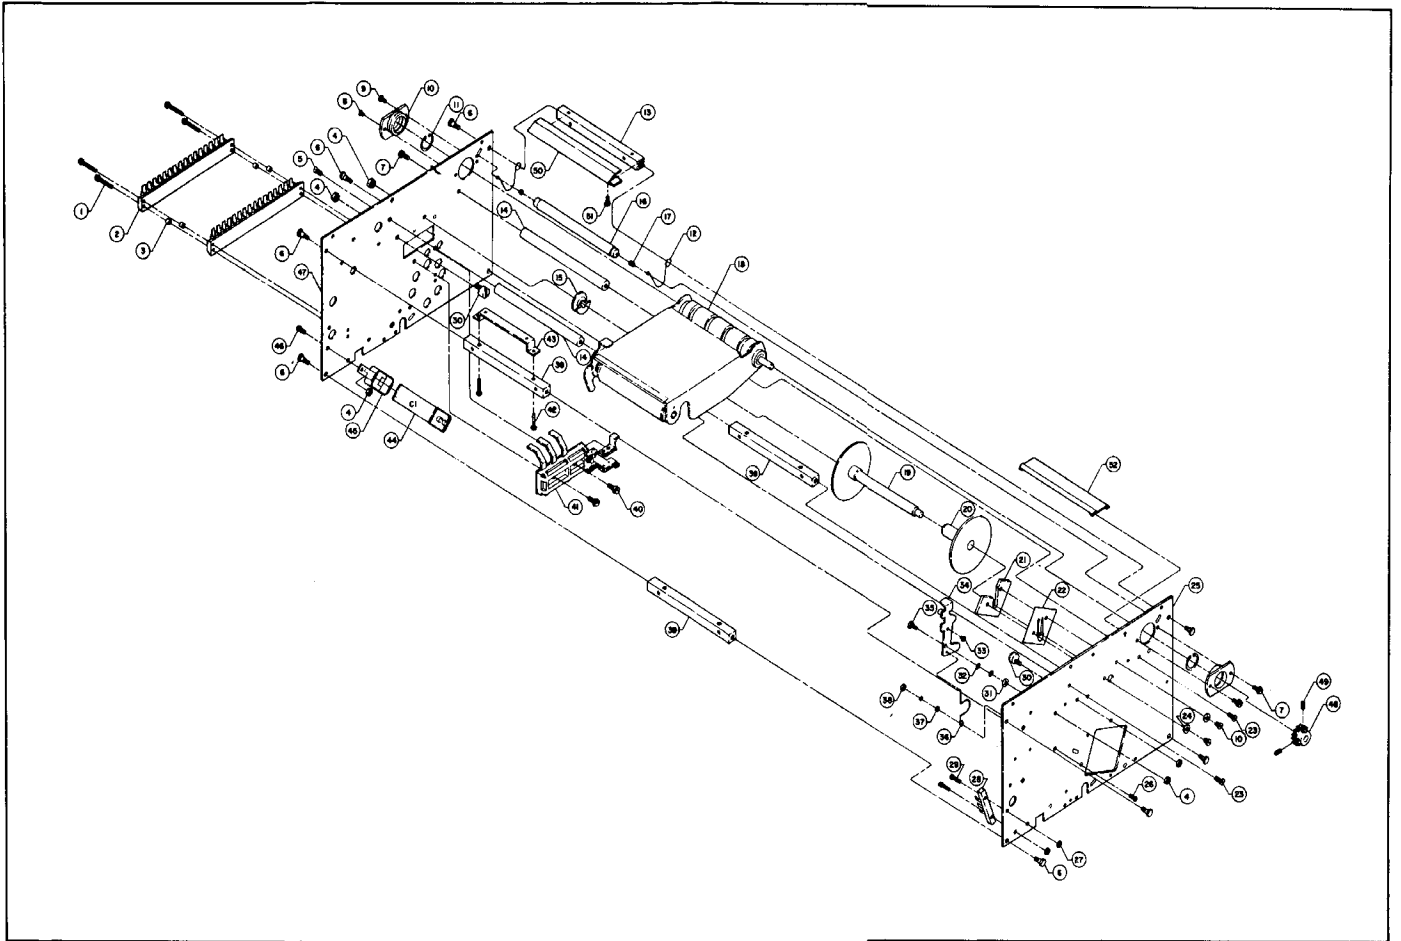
Paper Drive Assembly (table, brake and associated parts)
